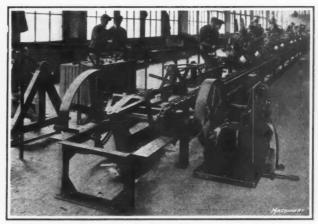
Formerly the Packard Motor Car Co. assembled clutch units on stands that were distributed over the floor of the clutch assembling department. The Palmer-Bee Co. suggested that the progressive method of assembly be employed in handling them, so a conveyor system was installed, which carries stands similar to those formerly employed
